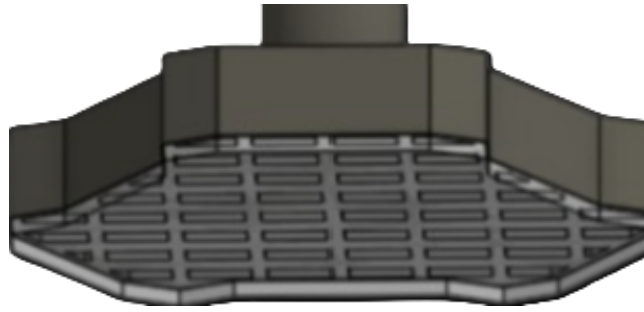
Microwave Sintering Head CAD Model. CAD model of the VT Luna microwave sintering head assembly incorporating a custom-designed waveguide applicator system. The assembly integrates the RF generation interface, waveguide feed structure, and regolith-facing aperture used for controlled layer-by-layer microwave energy deposition. The design prioritizes mechanical simplicity, dust tolerance, and reliable RF delivery in a lunar environment, enabling repeatable and uniform sintering of regolith layers for landing pad construction. The sintering head is enclosed with a microwave-transparent quartz layer that provides structural protection, dust mitigation, and controlled compression of the regolith during processing while maintaining high microwave transmission efficiency.
